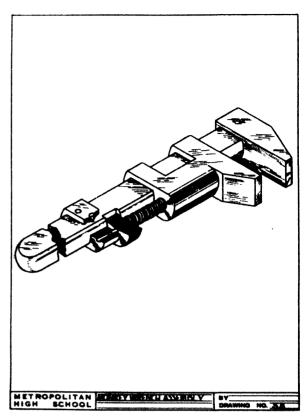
ASSEMBLY OF MONKEY WRENCH (PROBLEM)
